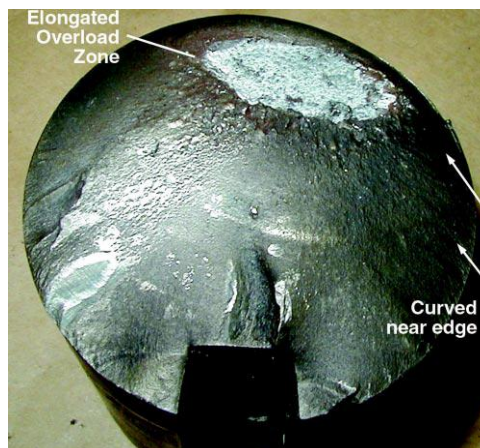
A cross-sectional view of classic fatigue failure (adapted from [54])
